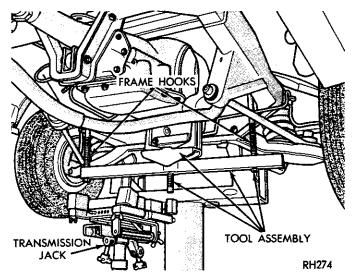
Typical Engine Support Fixture STARTER RING GEAR REPLACEMENT
